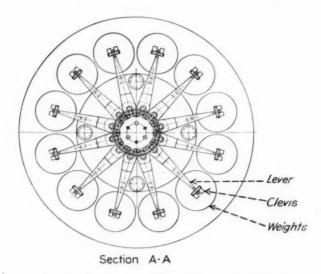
Arrangement of Levers, Section A-A, Fig. 5.
